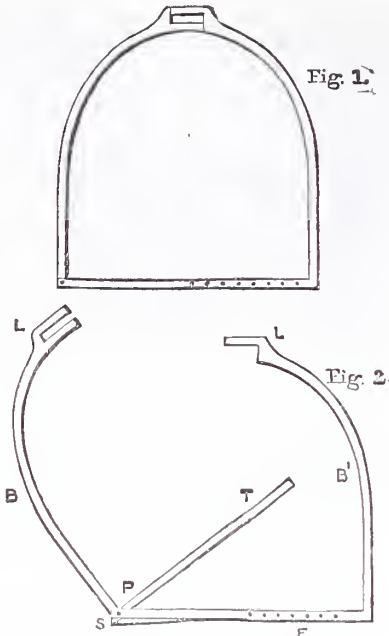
Stirrup with Joint at Strap-eye. Fig. 2.—Same Stirrup shown half open.
